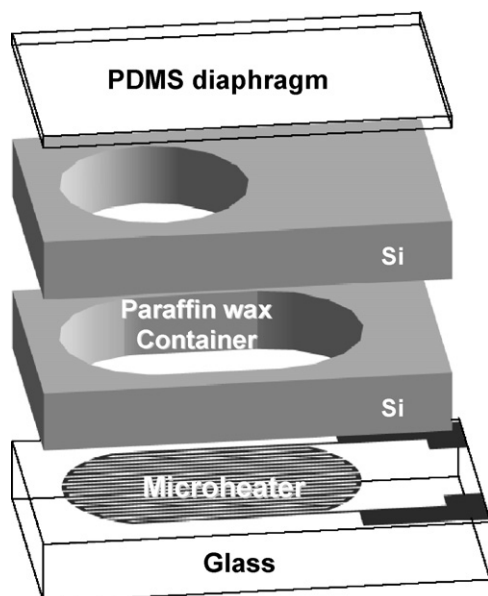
Exploded view of the basic bulk-micromachined microactuator.
